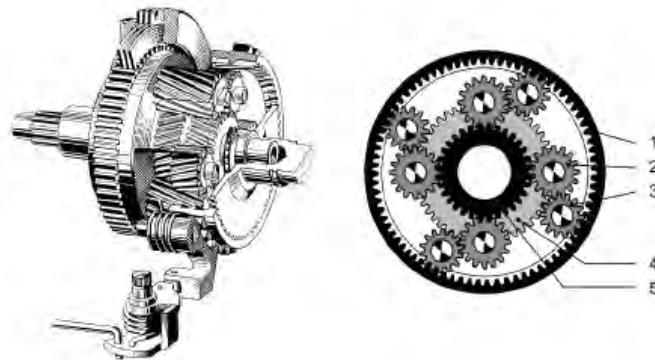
Ravigneaux planetary gear set. 1 Common ring gear; 2 narrow planetary gear; 3 broad planetary gear; 4 large sun gear; 5 small sun gear [6.5]
